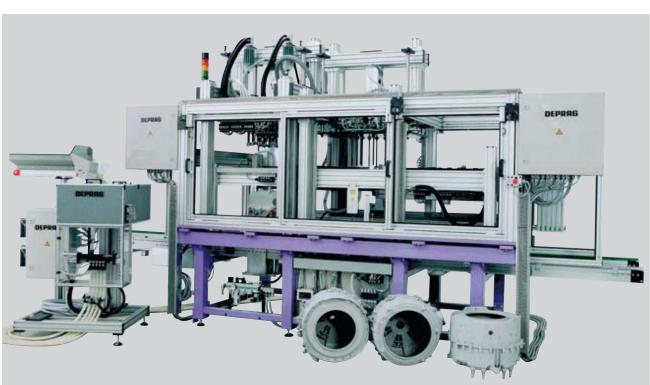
4-Spindle Unit for the dis-assembly of contact screws on electric switches after final control.
